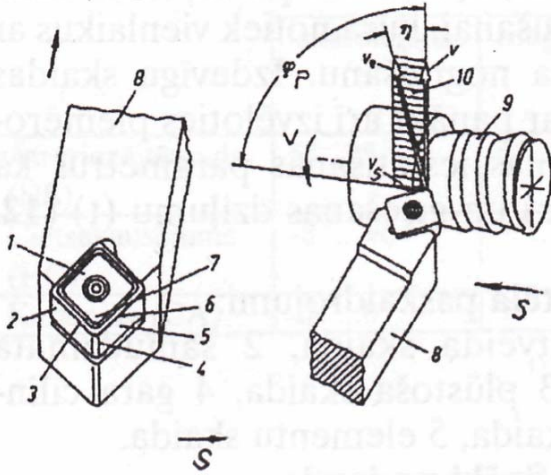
Cutting tool ( 1 - cutting insert, 2 – secondary plane, 3 - auxiliary cutting edge, 4 - cutting edge nose, 5 - main back surface, 6 - main cutting edge, 7 - chip breaker, 8 - cutting insert holder, 9- machined part, 10 - work plane,  $v$  - cutting speed,  $v_e$  - effective cutting speed,  $\square_p$  – feeding movement angle,  $\eta$  - machining speed angle).
